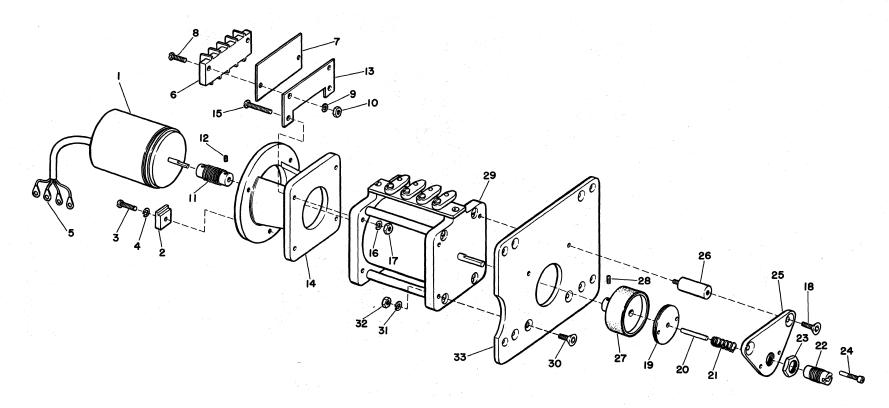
A 501 520 00 CENTER DRIVE ASSEMBLY-EXPLODED VIEW
